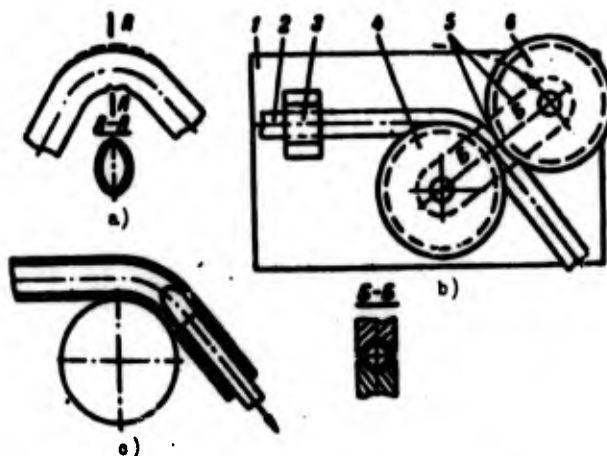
Diagrams of the bending of pipes: 1 - table of machine; 2 - billet of pipe; 3 - blankholder; 4 - roller; 5 - guide; 6 - rolling roller.
